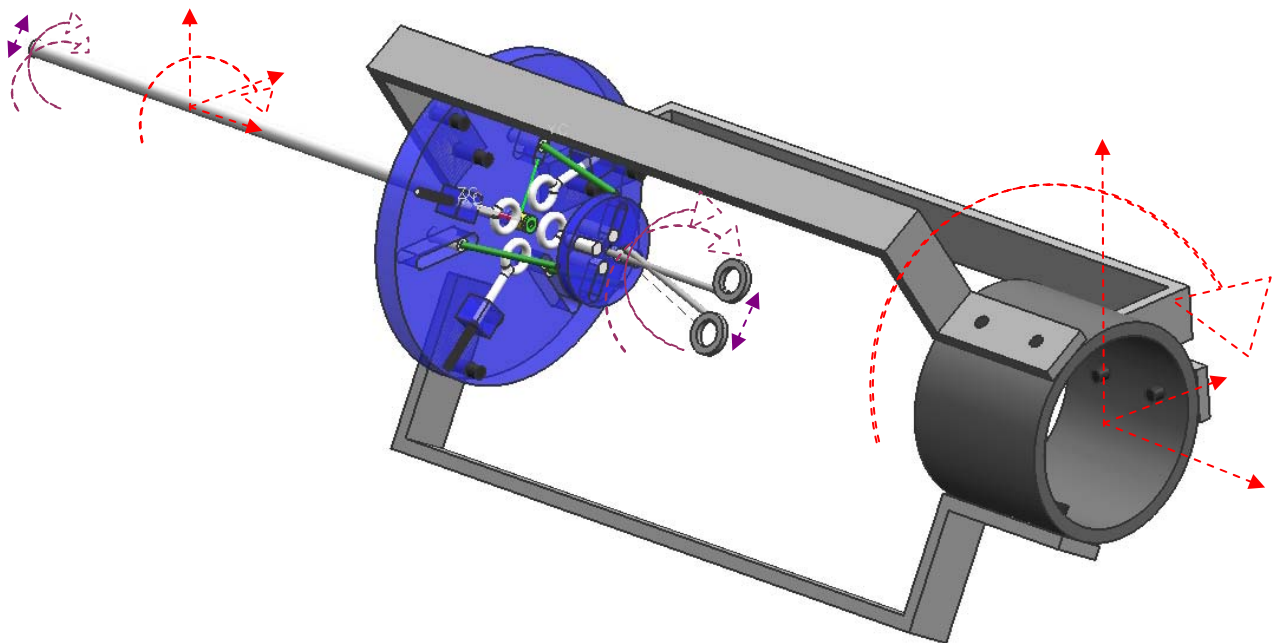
Rendering of compliant U-Joint tool tip and compliant gripper mechanism
